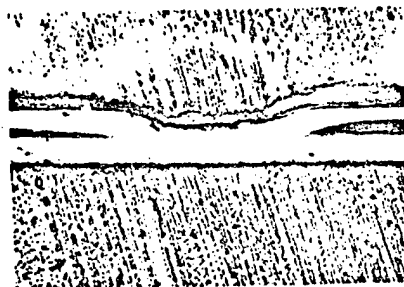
Longitudinal section through roller welding of Figure 11.
